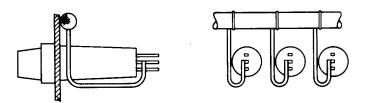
Fuse Blocks — 18A and Similar Types — No. 14 Gauge and Smaller Wires
